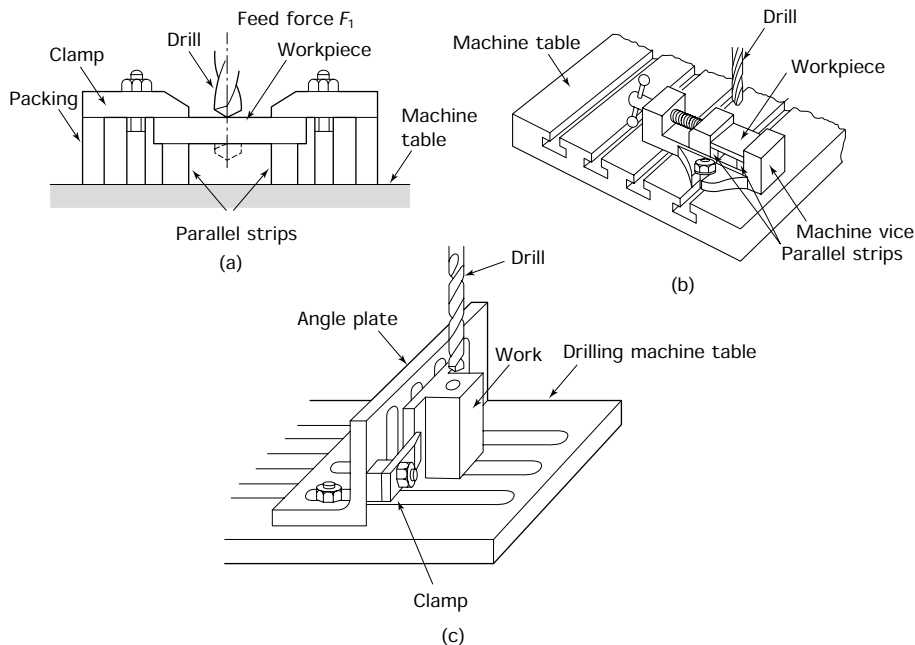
Workholding – rectangular workpieces: (a) direct clamping to the machine table; (b) use of a machine vice; (c) use of an angle plate
